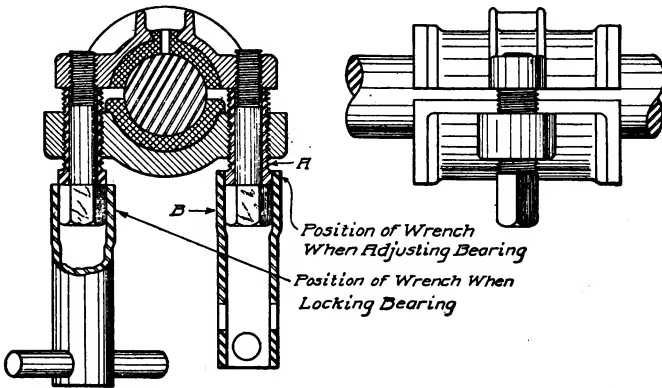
Connecting Rod and Main Bearings Constructed without Shims
